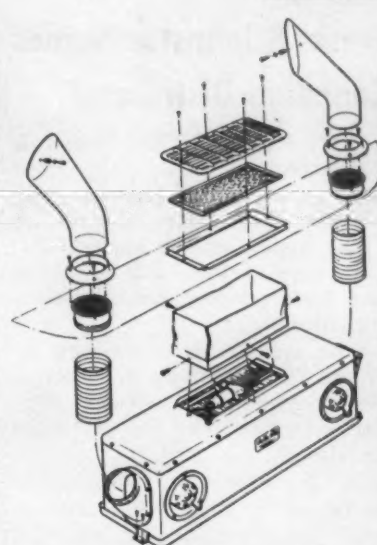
Exploded view shows duct connections and cooling case assembly of 1956 "Executive" model.
